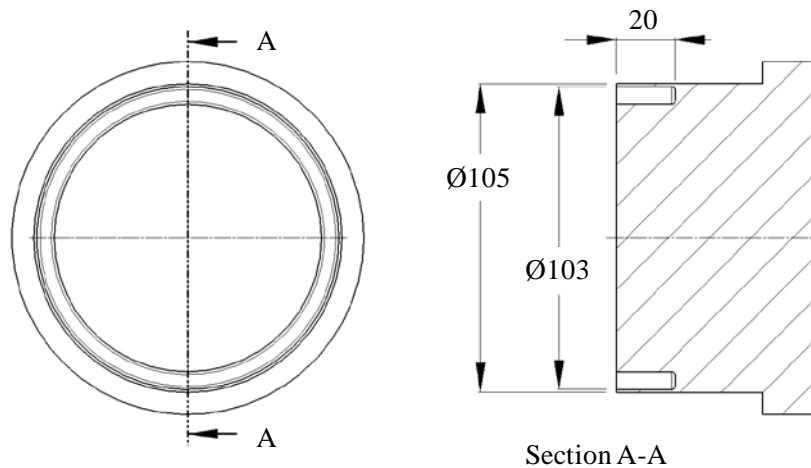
Resulting Ti-6Al-4V workpiece geometry derived from the unique face grooving operation (dimensions in mm), for reference only.
